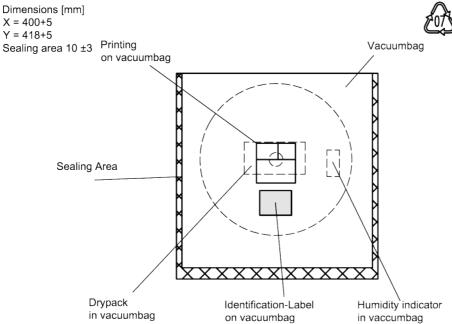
Drawing of moisture barrier bag (MBB) for reel with diameter of 330 mm.
